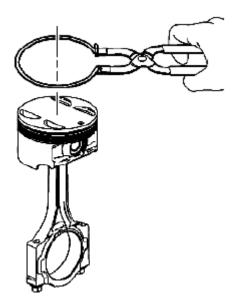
Identifying Oil Control Rings Courtesy of SUZUKI OF AMERICA CORP.
